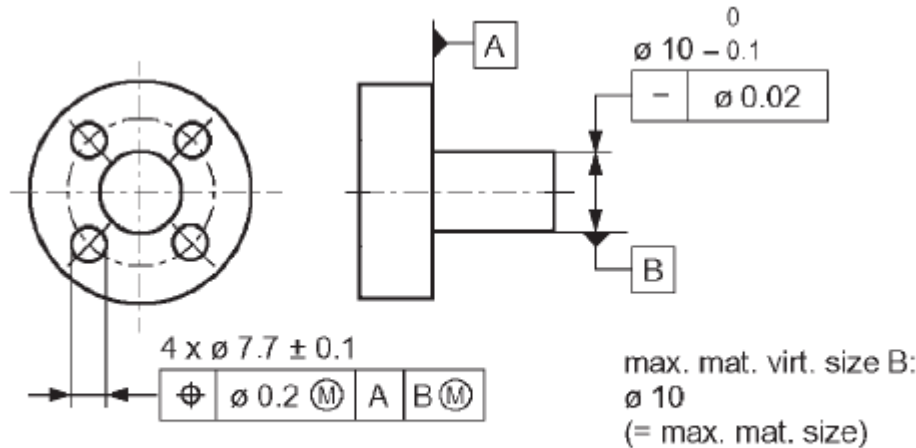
Maximum material virtual size of datum B; form tolerance (straightness) to be disregarded
